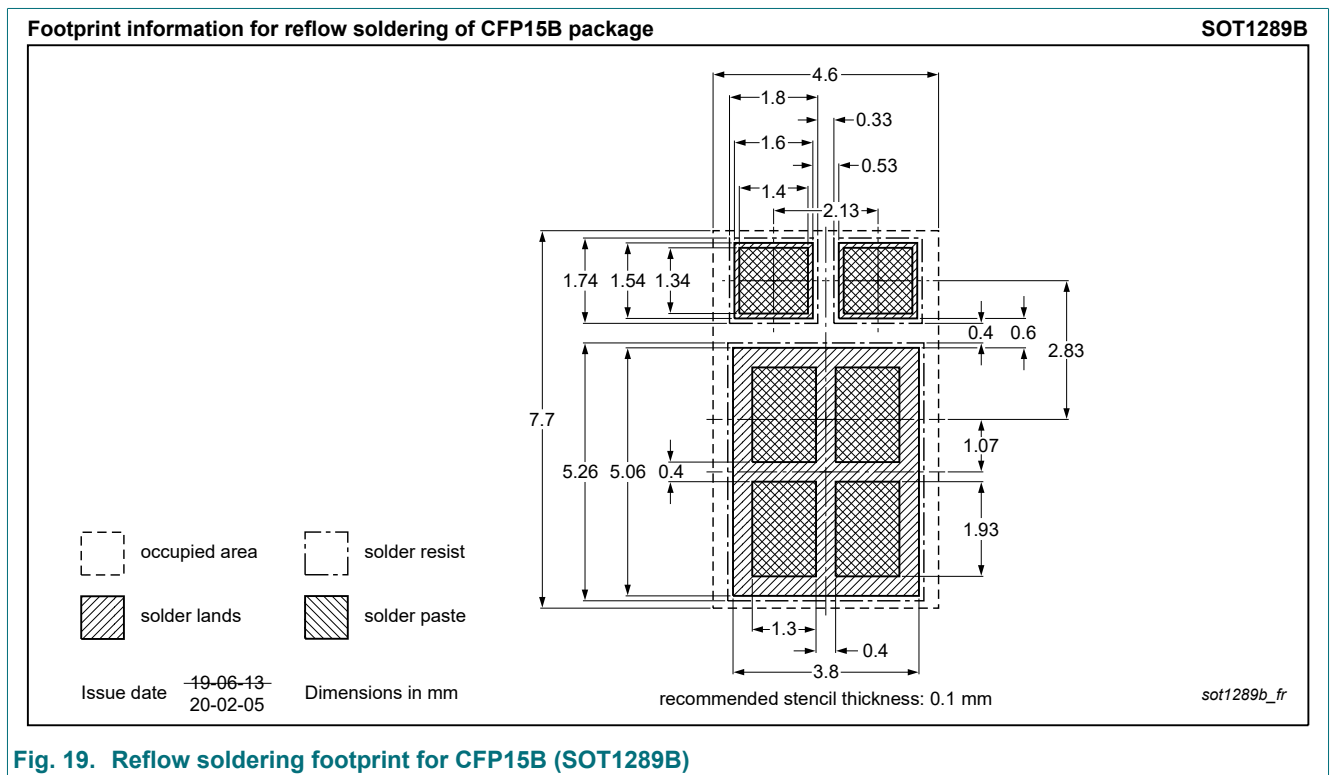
Reflow soldering footprint for CFP15B (SOT1289B)
